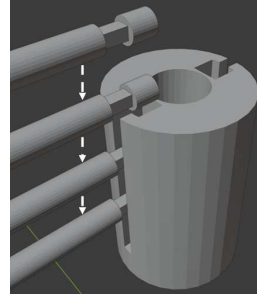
CAD model showing cable-to-spool attachment mechanism
